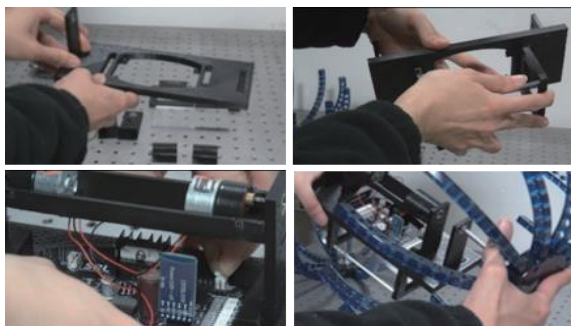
Structure for ease of assembly of the robot for educational purposes
